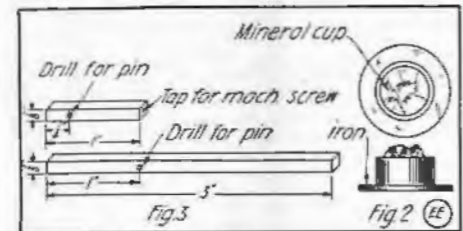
One piece is 3 inches long and the other, 1 inch long. In the shorter one, bore a small hole 1/4 inch from one end. In the other end bore a hole and tap it to fit a machine screw. In the longer one
